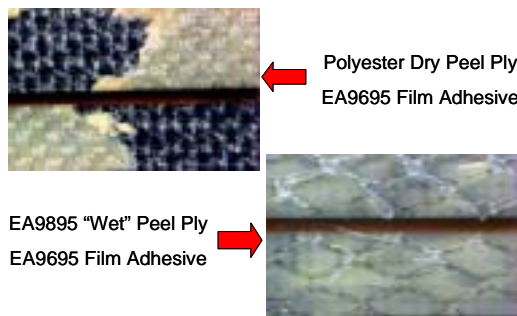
$G_{Ic}$  Fracture Surfaces
